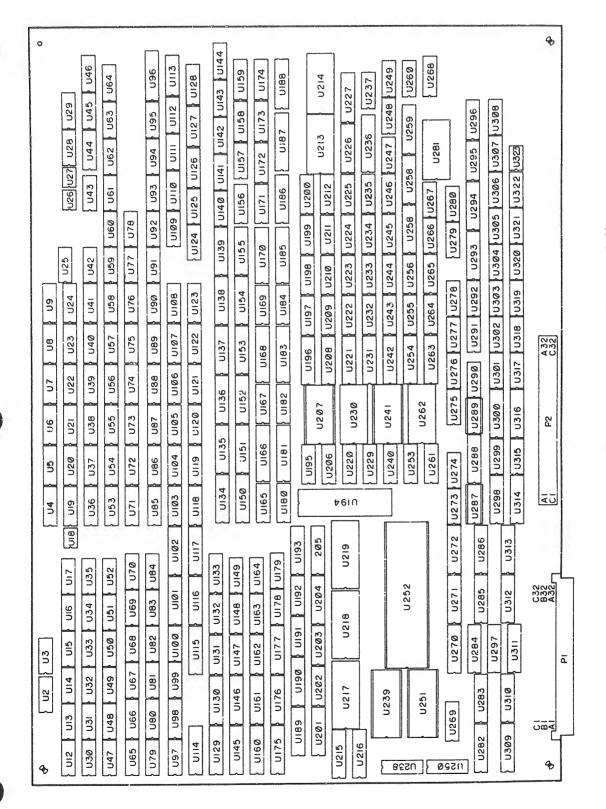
SCM Parts Location (sheet 1 of 2)
